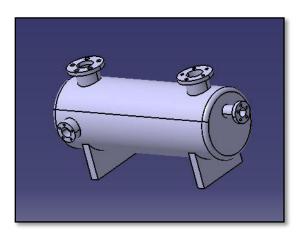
ISOMETRIC VIEW FLATE HEAD
